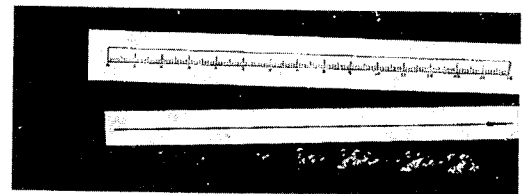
Photograph of fillet weldment after tracking weld line (offset angle = 40, welding speed = 4(mm/sec), weave length = 4(mm), weaving time = 0.3(sec), dwell time = 0.12(sec))
